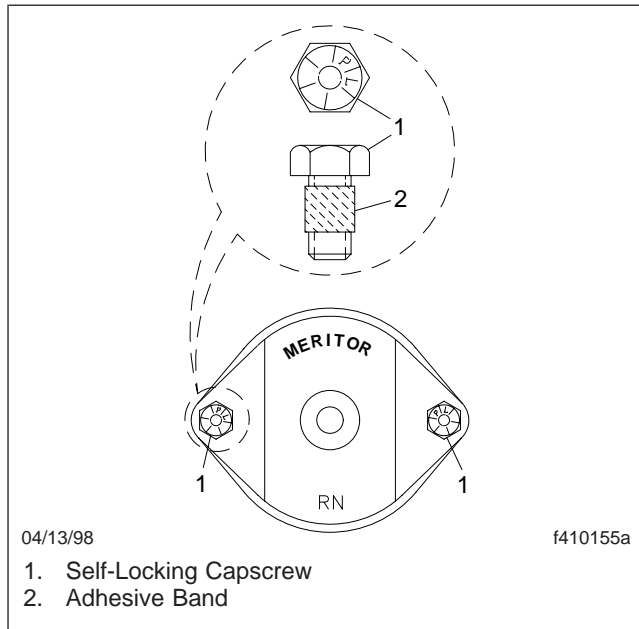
, Meritor U-Joint Fasteners for Full-Round Yokes
